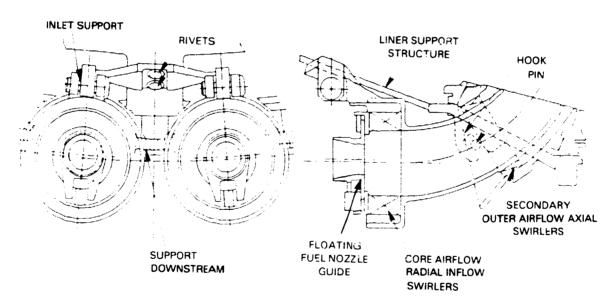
Combustor Main Zone Carburetor Tube Assembly
